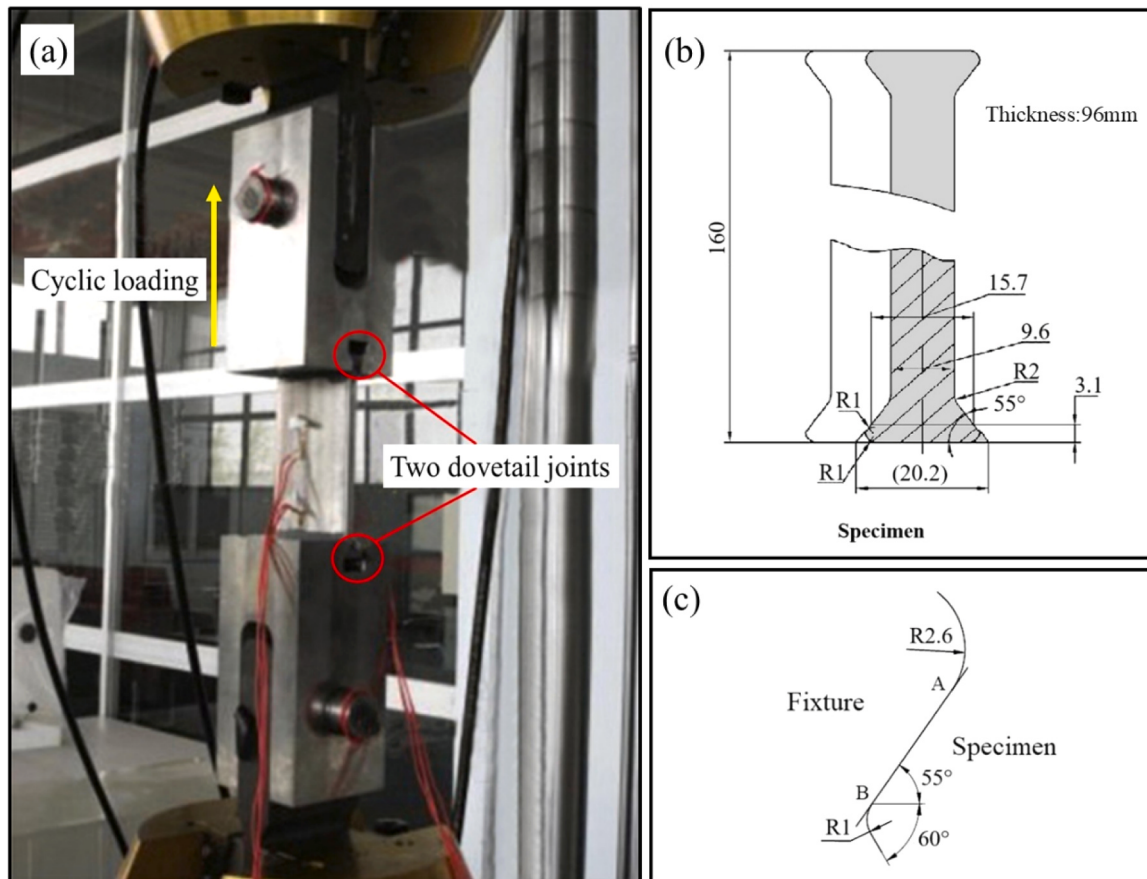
Experimental setup and geometric details of the dovetail joint [28]: (a) overview of the experimental setup, (b) geometric dimensions of the specimen and (c) detailed dimensions of the contact surface.
